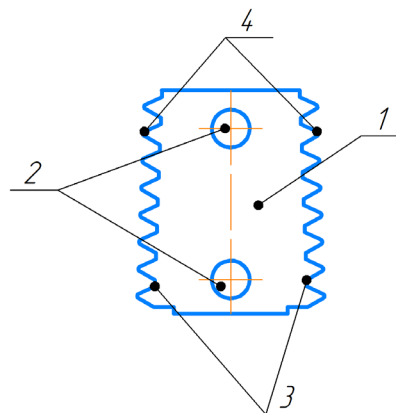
Toothed-comb hammer of a hammer crusher [107]:
